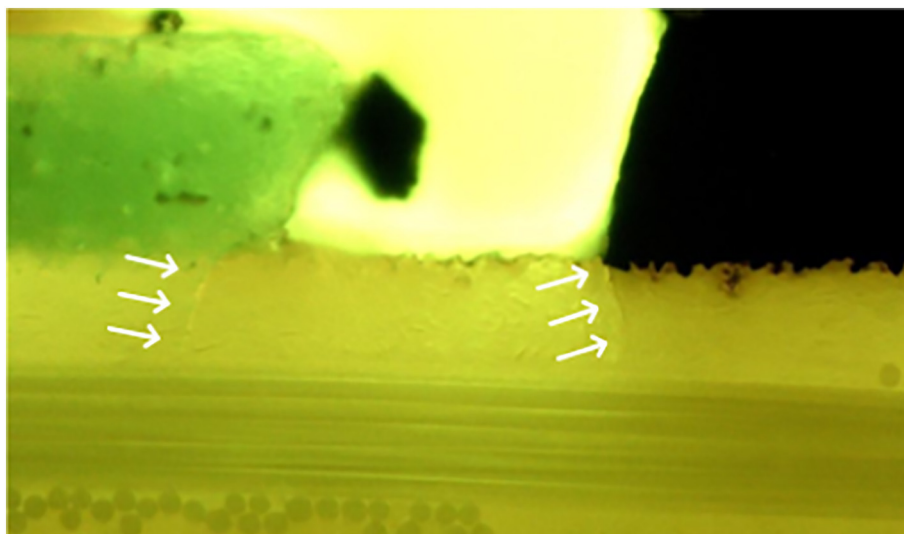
Cross-sections of a solder joint to a thermally cycled resistor showing PCB cracks formed both at the PCB - solder mask edge and at the PCB - solder pad edge.
